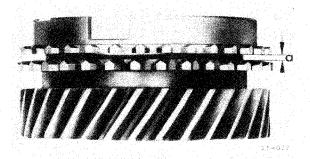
Synchronizer ring 1st/2nd gear, checking
